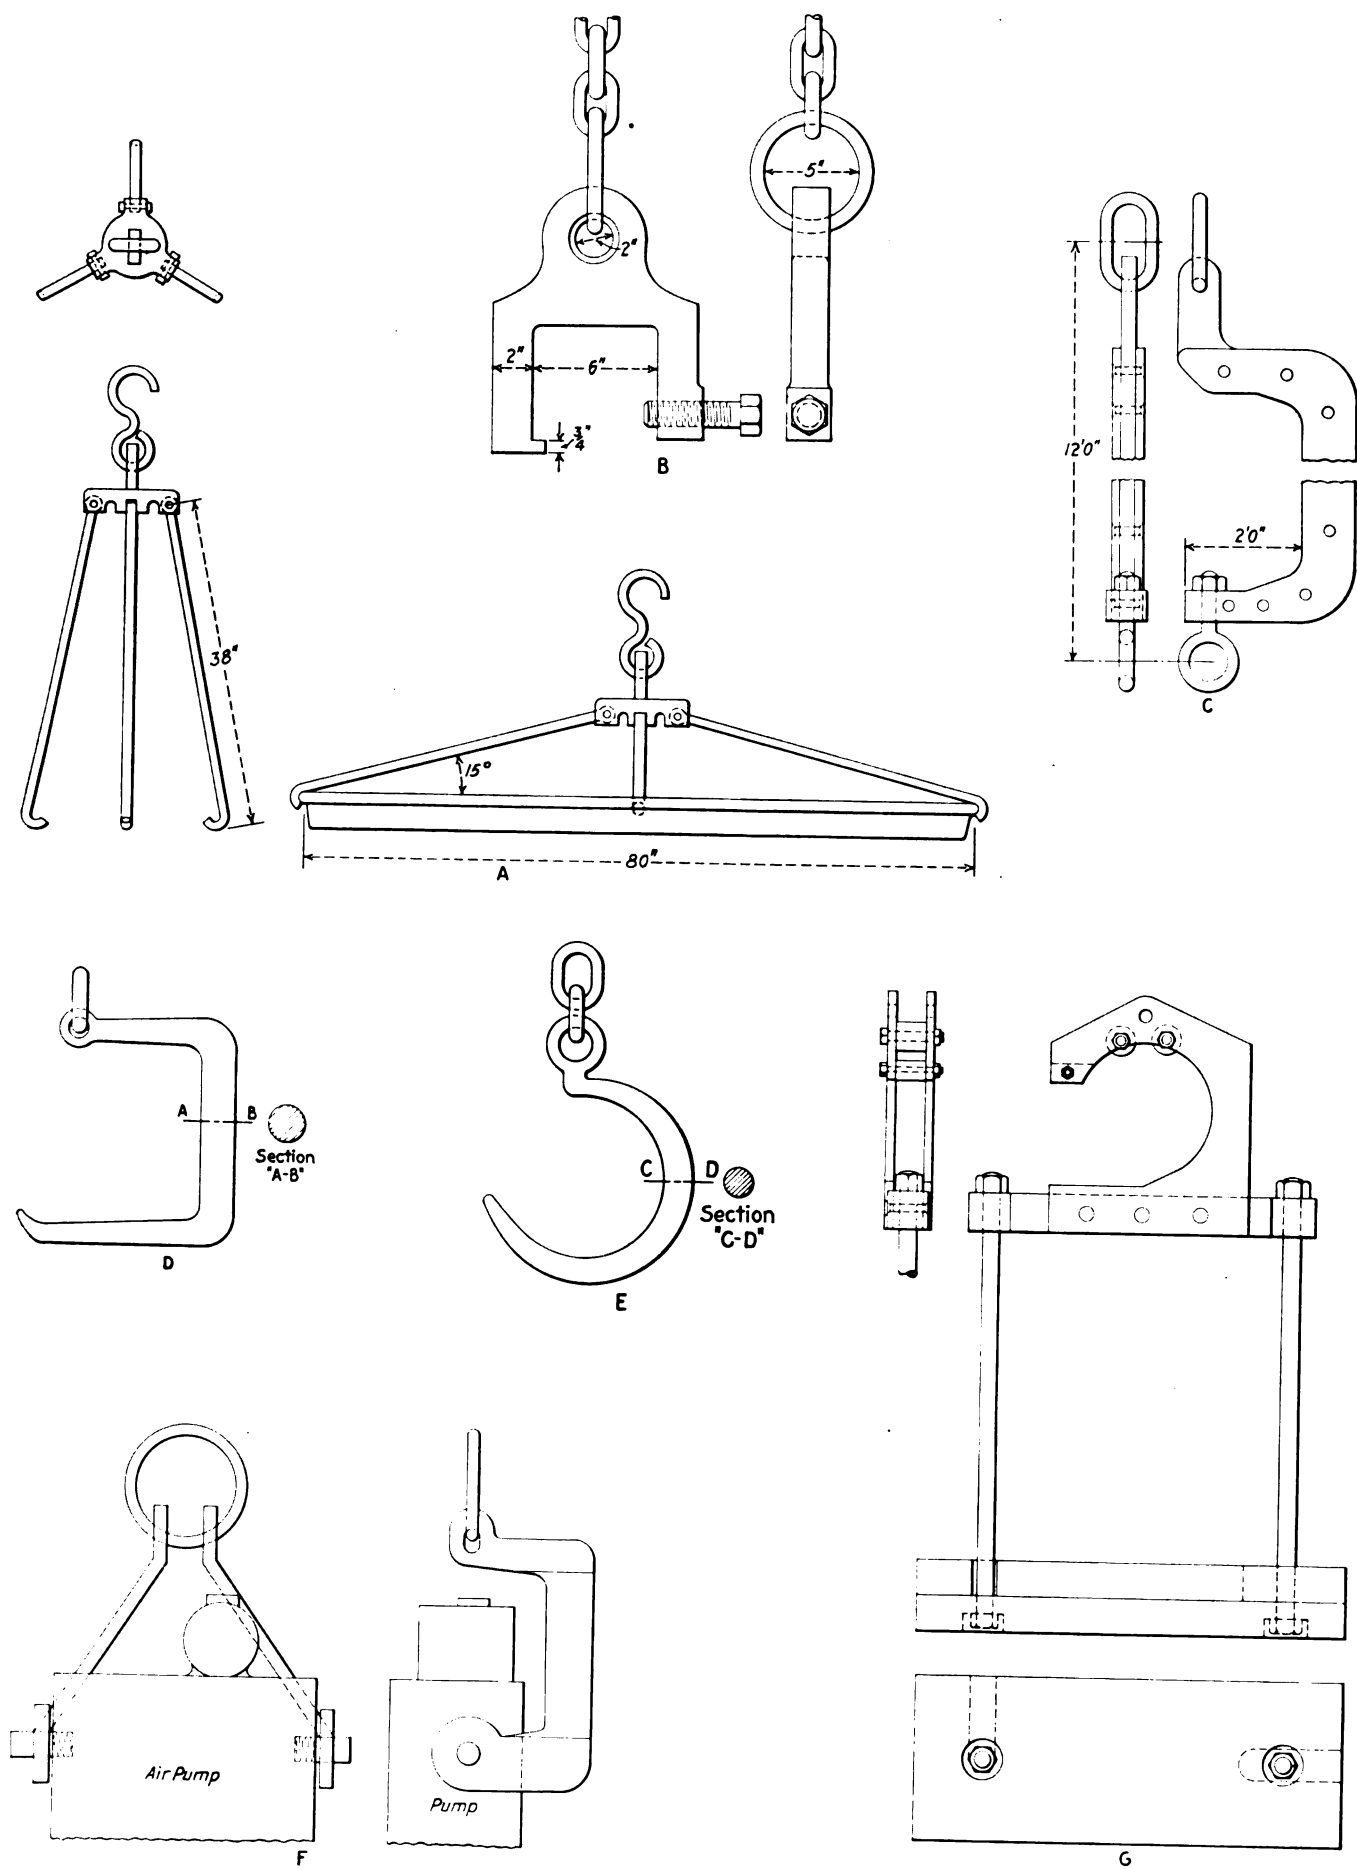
Special devices for use with a railroad shop crane in lifting (A) and (B) driving wheel tires, (C) driving rods, (D) stoker elevators, (E) bald flange tires, (F) air pumps, (G) counterbalance weights
